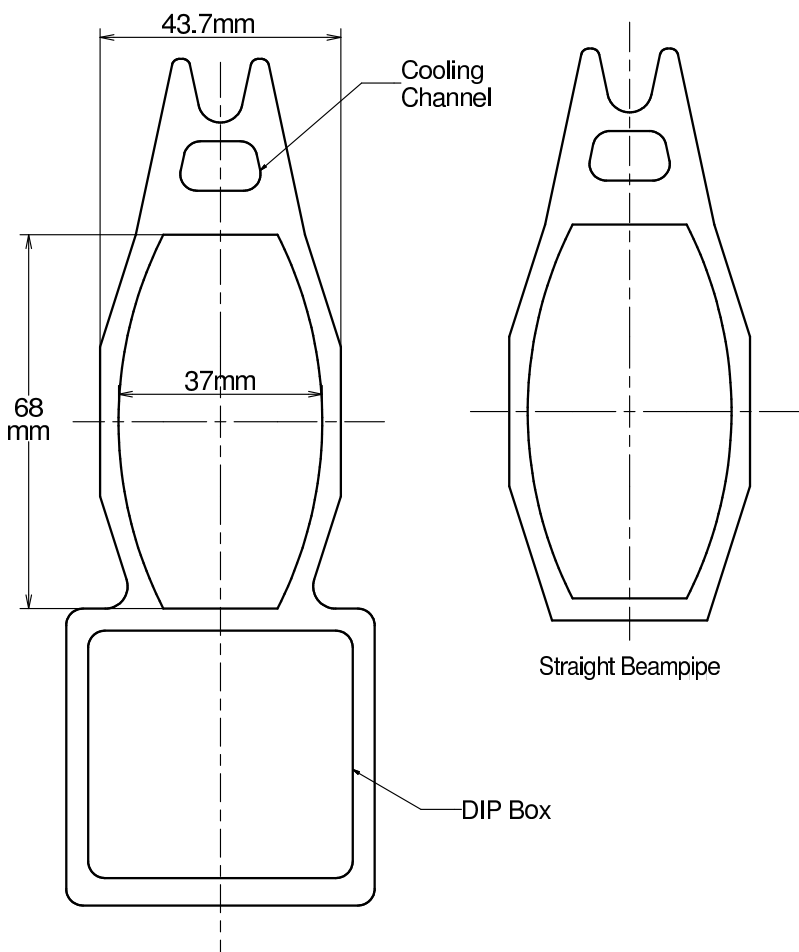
Cross-section of the aluminum extrusion. For straight sections the DIP box will be machined off allowing the tube to pass through quad and sext magnets.
